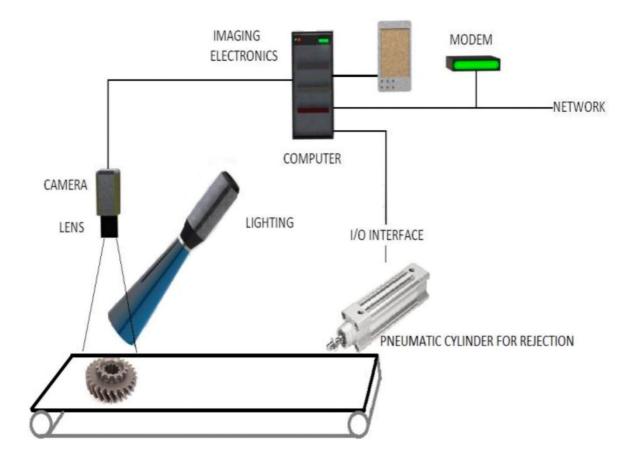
Machine vision inspection (Sathiyamoorthy, 2014)
